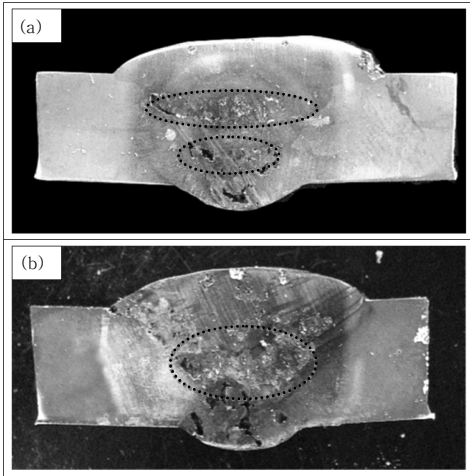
Corroded surface by pitting, test temperature (a) :65°C, (b):75°C
